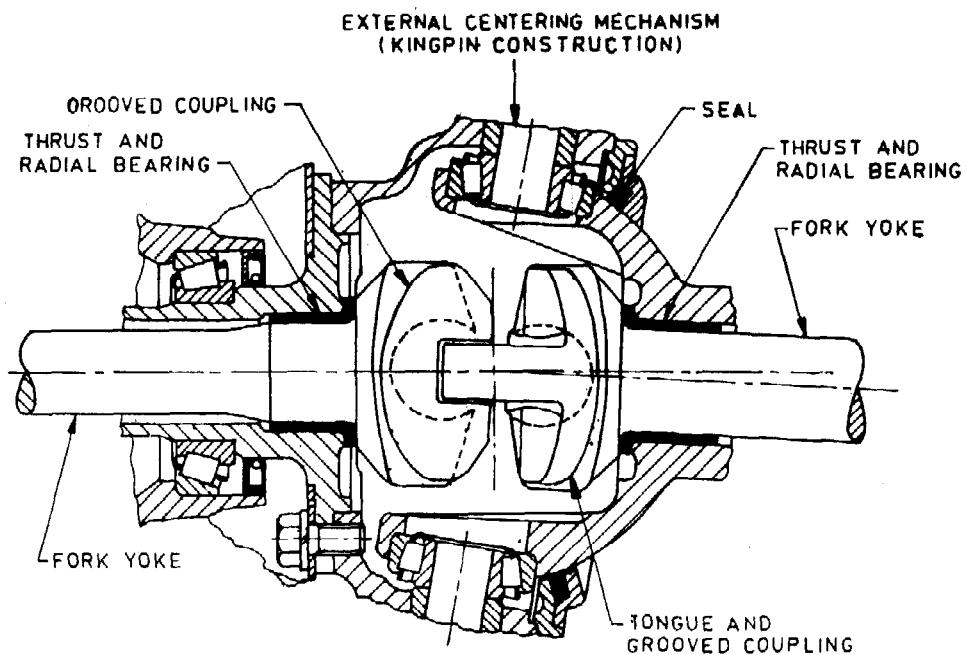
TRACTA UNIVERSAL JOINT, WHEEL POSITION APPLICATION
